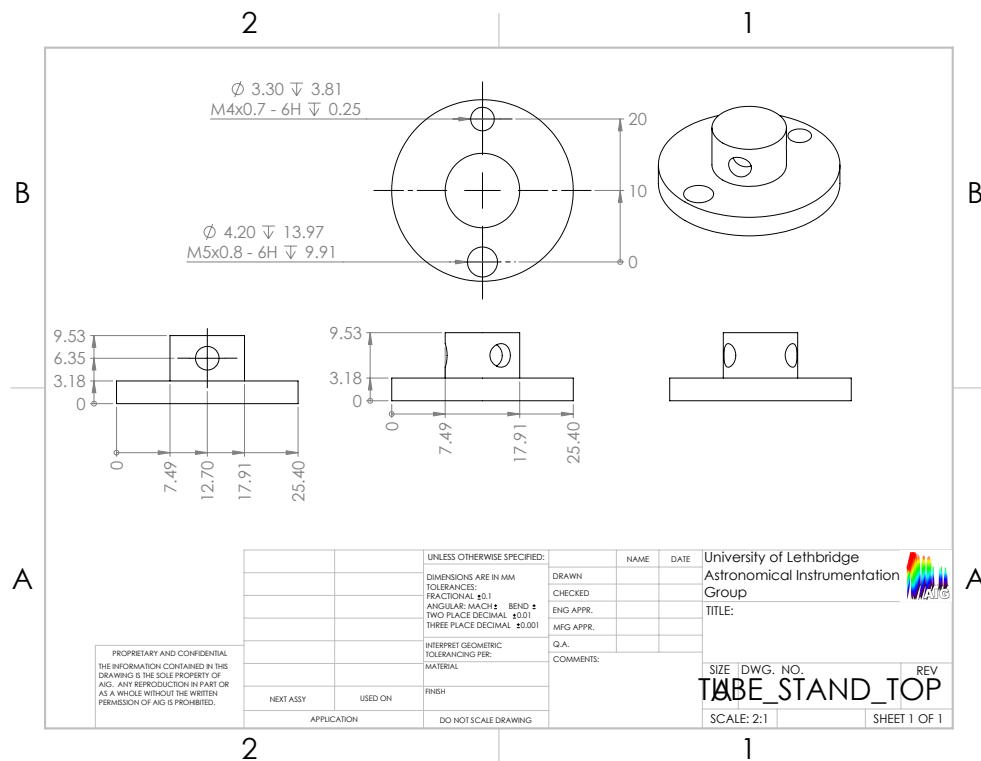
The strut foot for bolting to the 4 K plate of the cryostat. Two holes for attaching to the plate must be tapped, and the three central holes must be threaded for attaching the strut.
